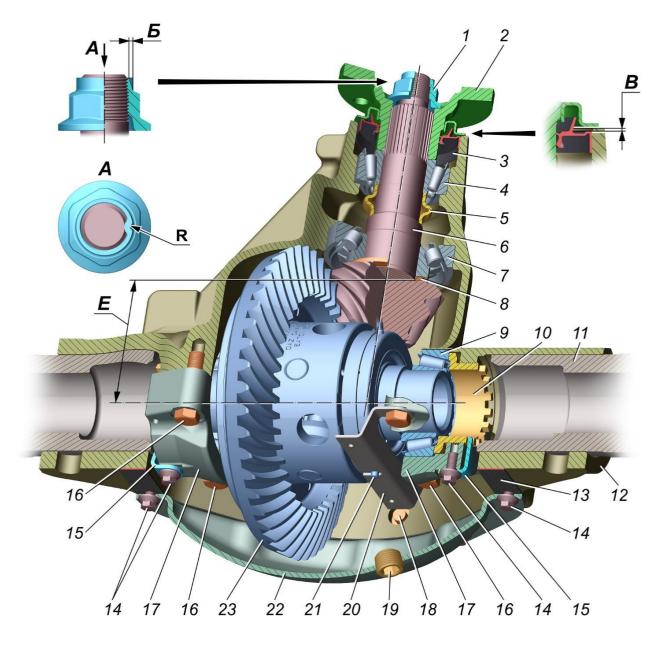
Rear axle gearbox with locking differential: B=0.8mm, min.; B=0.9-1.5mm; R=1.2mm, min.; 1 – nut; 2 – drive gear flange; 3 – collar seal; 4, 7, 9 – bearings; 5 – spacer bushing; 6 – drive gear; 8 – adjustment ring; 10 – differential bearing nut; 11 axle shaft casing; 12 – rear axle housing; 13– gasket; 14, 16 – bolts; 15 – retaining plate; 17 – differential bearing cover; 18– magnetic plug; 19 – oil filler plug; 20 – retainer plate; 21 – solenoid cage pin; 22 – housing cover; 23 – locking differential with driven gear
